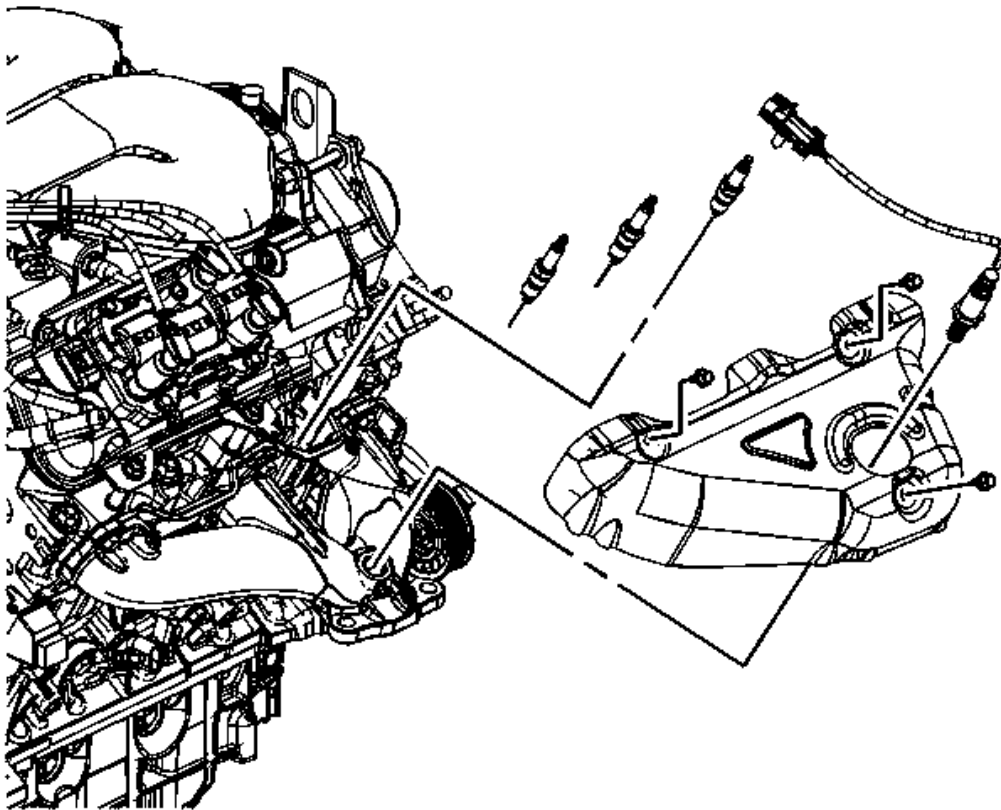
Identifying Right Side Spark Plugs, HO2S & Heat Shield
